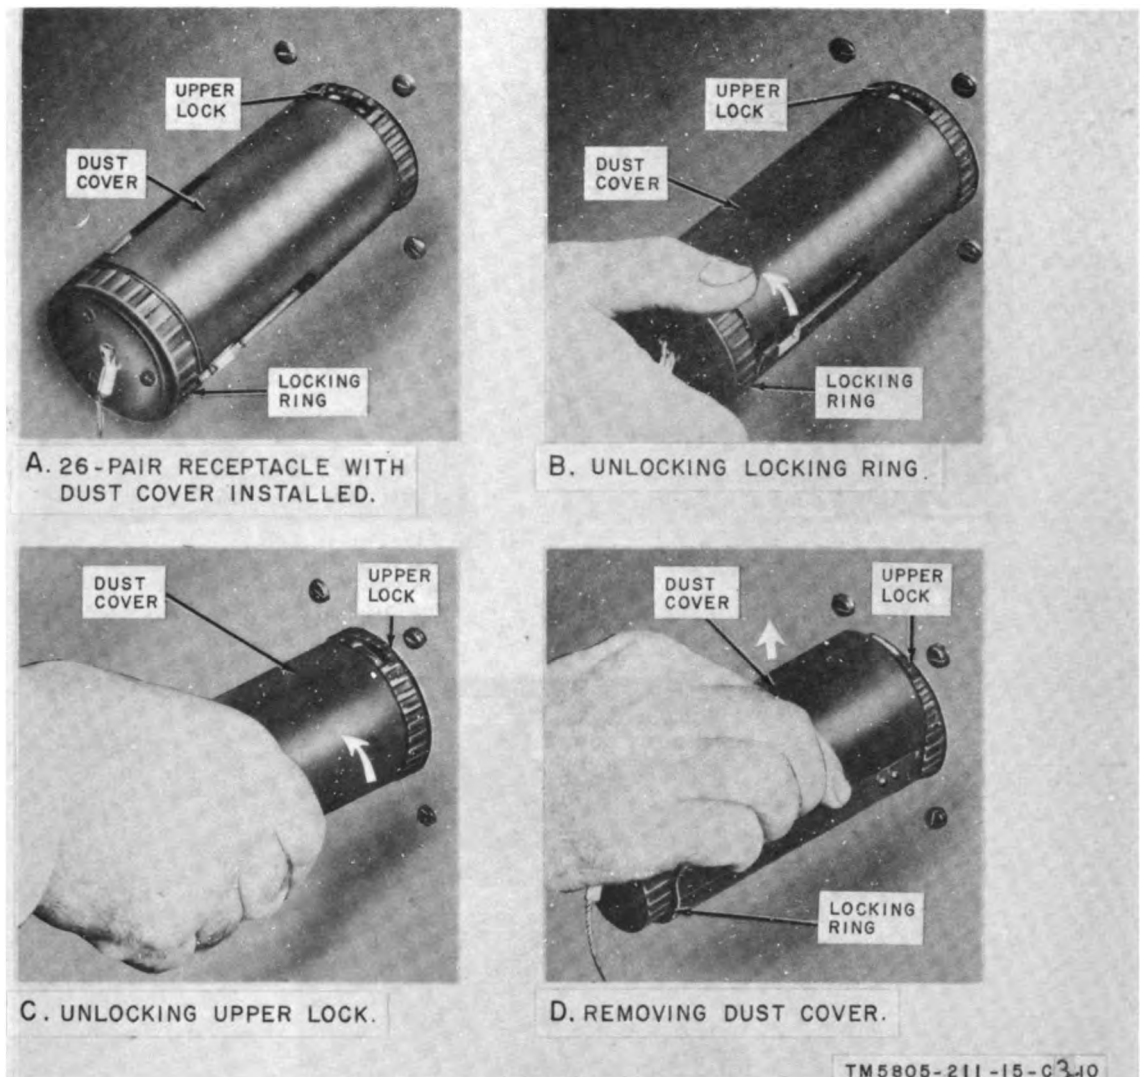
(added) Removal of dust cover with locking ring on outer end.
